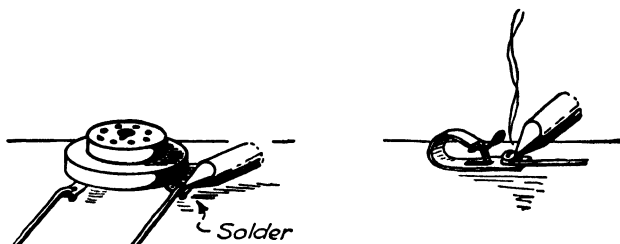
Solder all connections. Loose joints soon become dirty and the resistance of the joint increases. This produces noise in the set, erratic operation, or sometimes completely stops the set.
